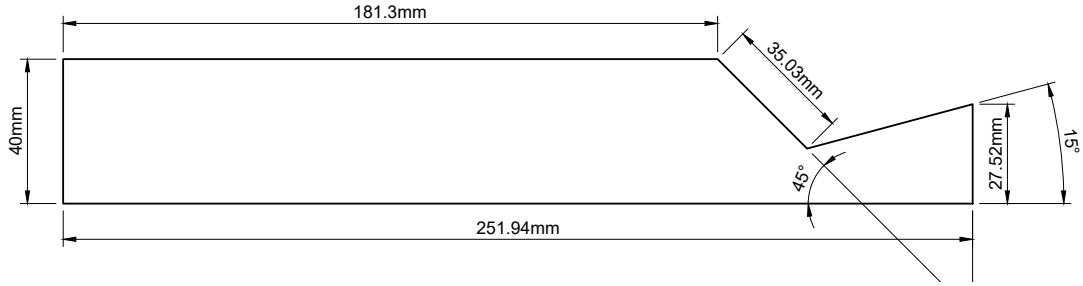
Aphlex 1B drawing with a conical nozzle and given dimensions.
